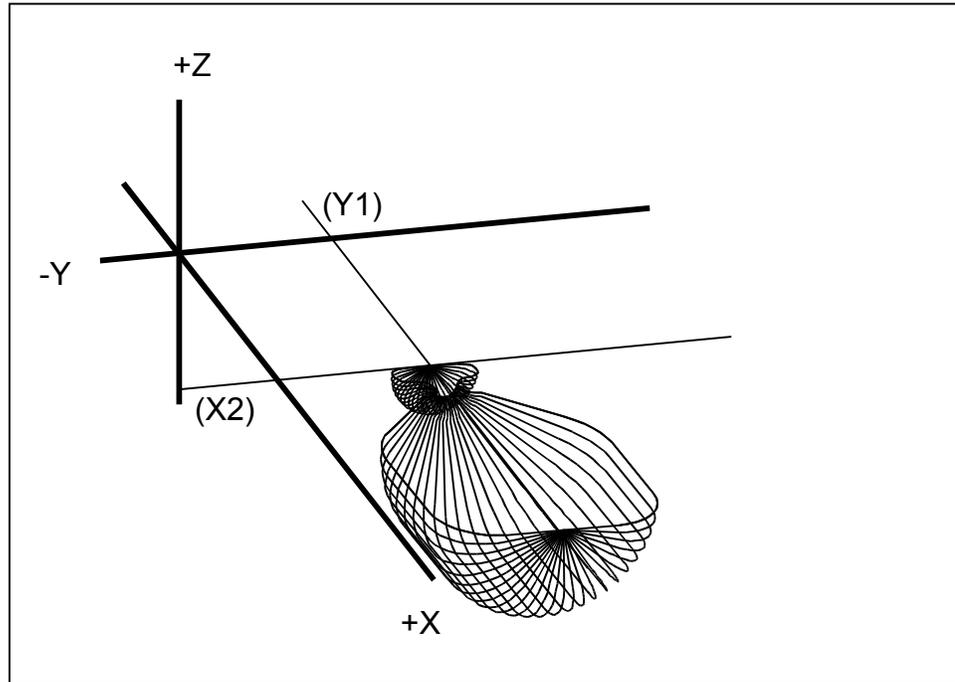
, Layout for Sample Program #7 - Mold Rotation
